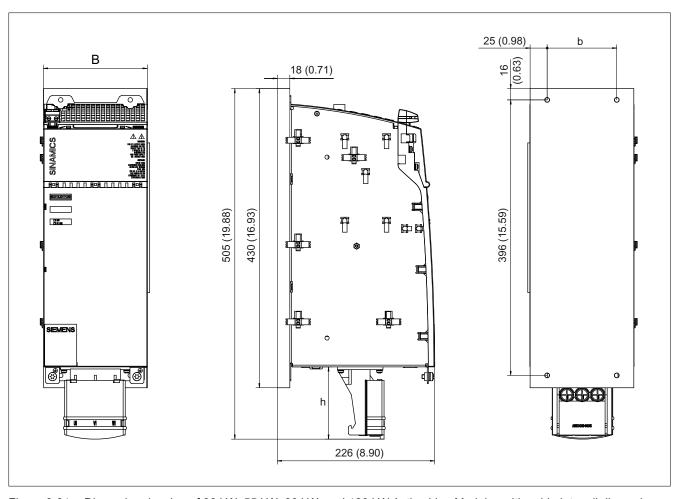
Dimension drawing of 36 kW, 55 kW, 80 kW, and 120 kW Active Line Modules with cold plate, all dimensions in mm and (inches)
